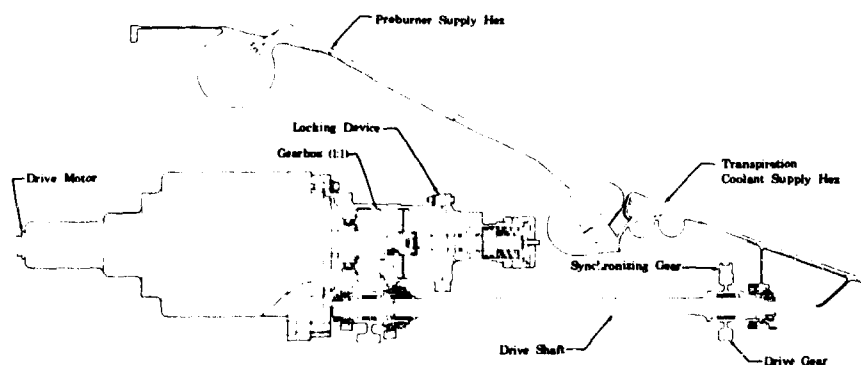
Drive Motor, Gearbox and Locking Device For Translating Mechanism
